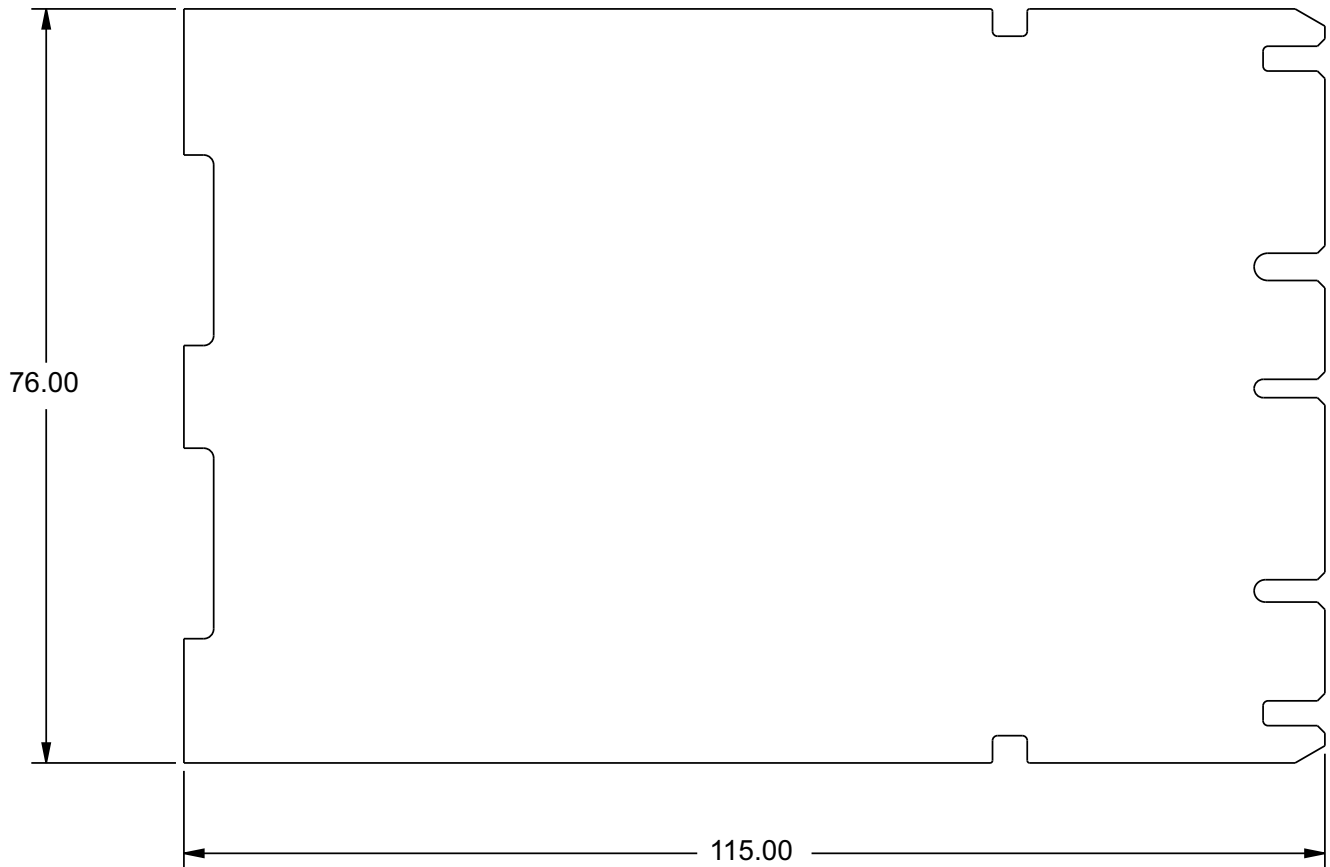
Low-Profile Bracket Outline and Dimensions (in millimeters)
